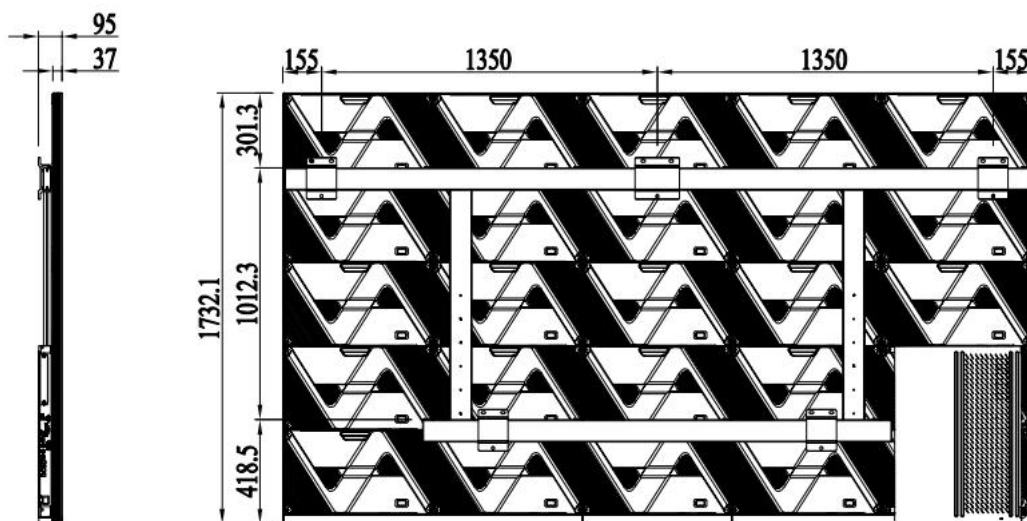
X 4K136 Wall-mounted Back View Schematic Diagram
